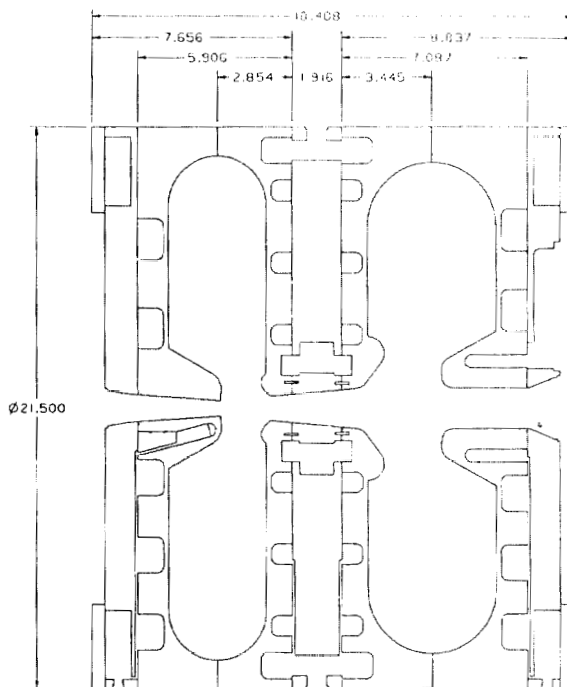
Engineering drawings of the first two MCTD cavities. Dimensions are in inches. Complicated pattern of lines between cavities indicate the spiral cooling channels.
